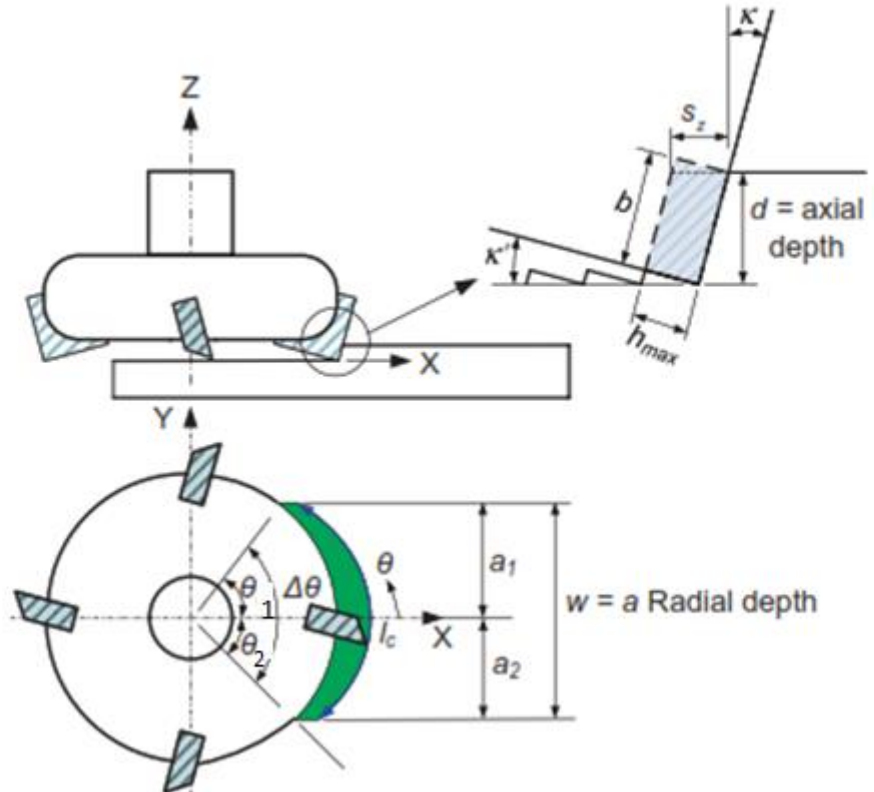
Chip thickness, contact length, and surface roughness in face milling
